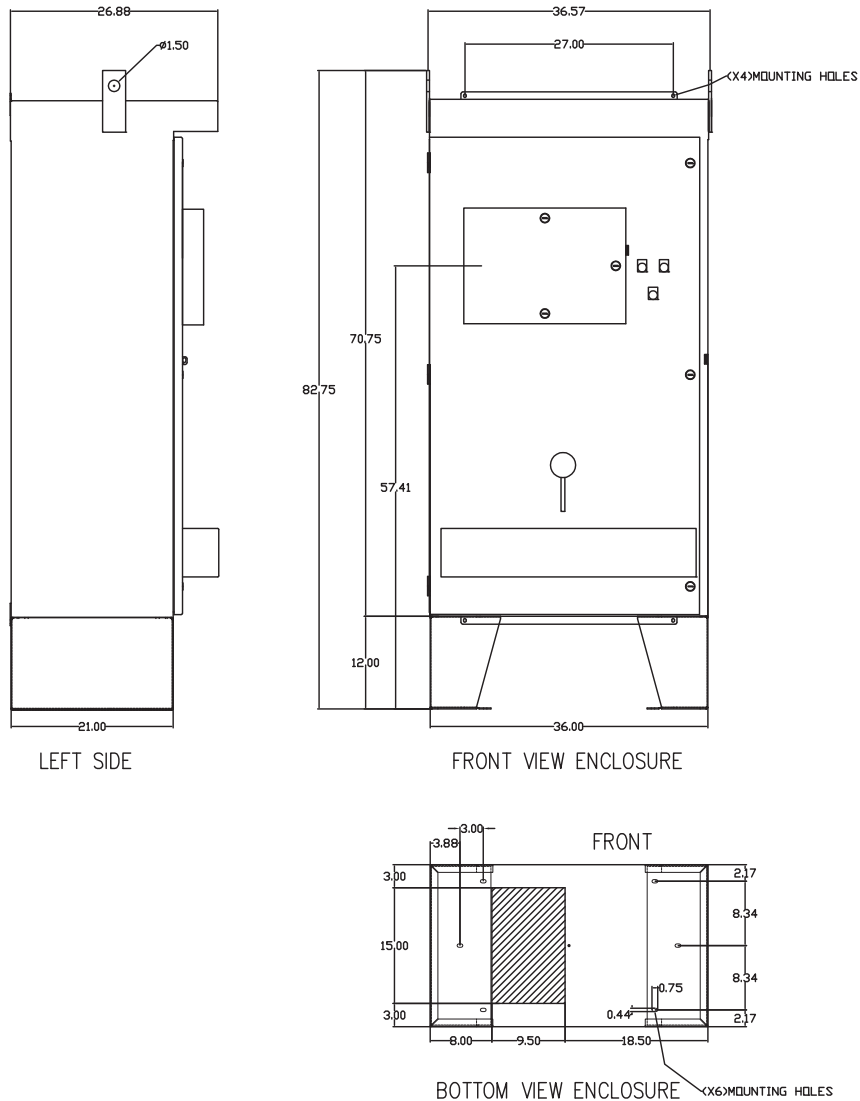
Frame 2 with Optional Floor Mount Kit Installed
